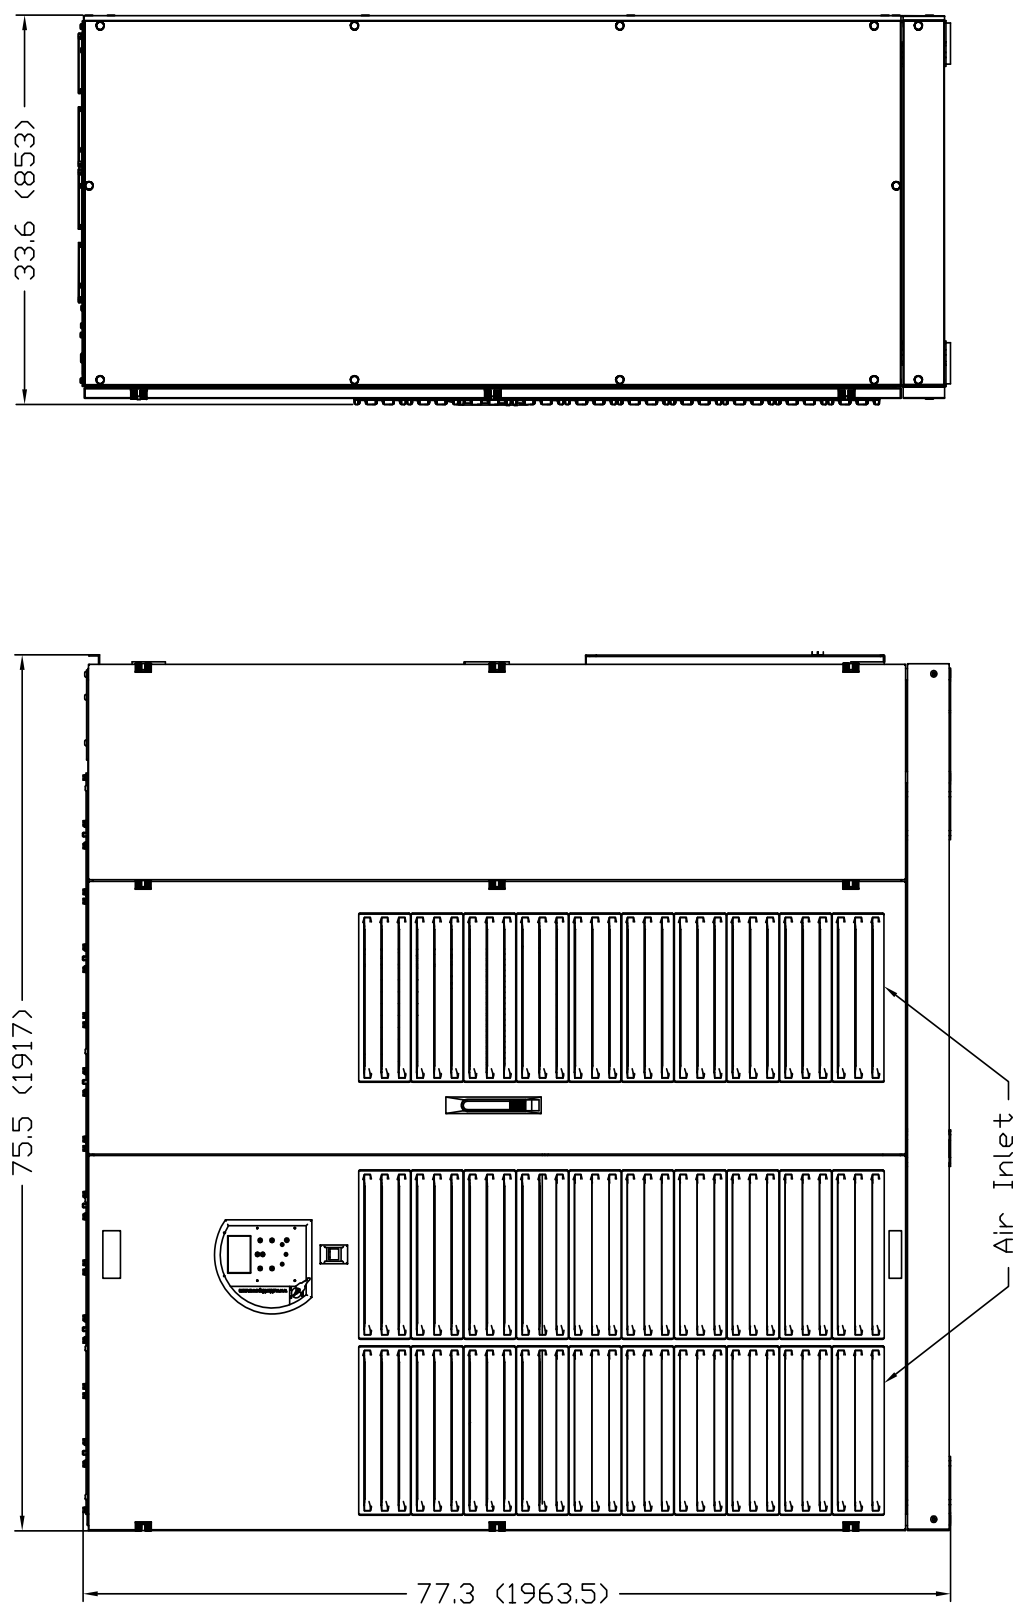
Output cubicle External Dimensions - Front and side views 750kVA
